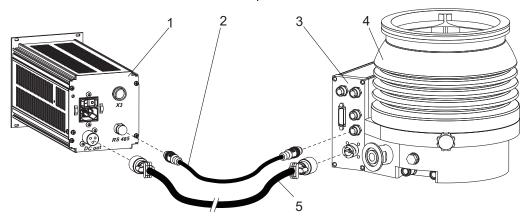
Example: Connection of a DCU with integrated power supply pack to a vacuum pump
